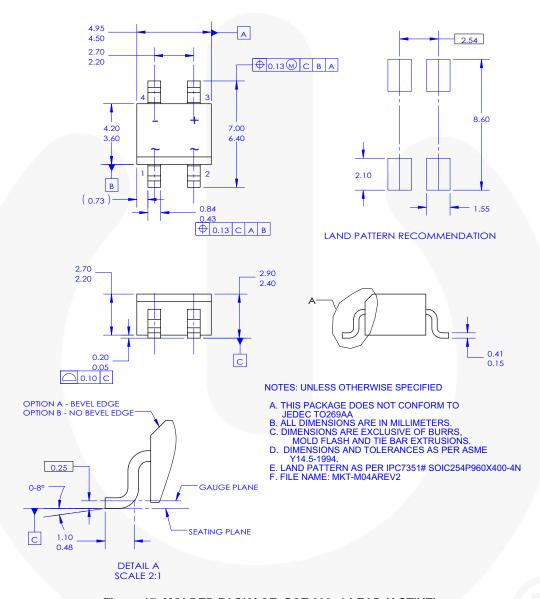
MOLDED PACKAGE, SOT-223, 4-LEAD (ACTIVE)
